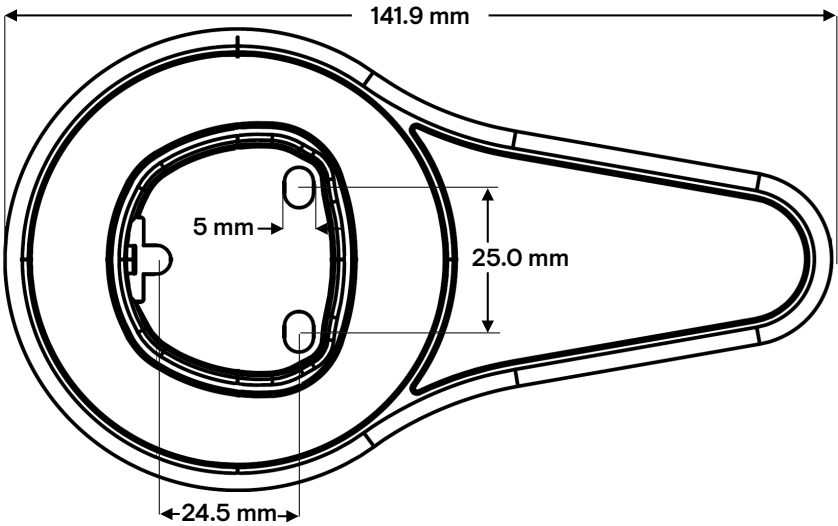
Mounting the SAE J1772 connector holster using the exterior wood screws and washers
